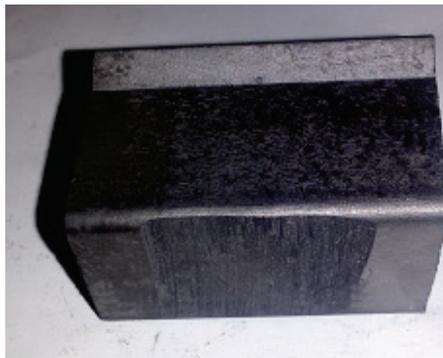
The general view of a fragment of the traditional contact strip (sample 3)
